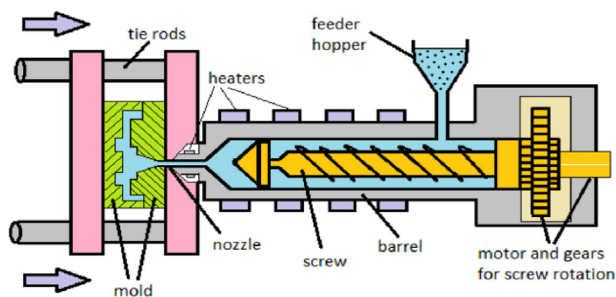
Extrusion injection molding for the fabrication of PLA biocomposites [62].
